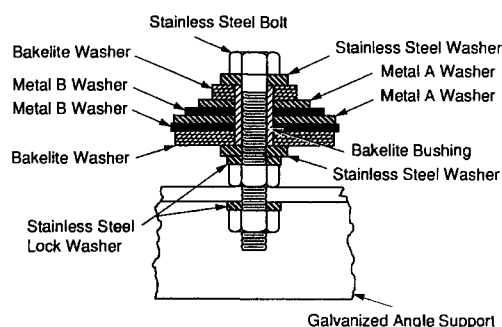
Cross section of disk test assembly for atmospheric galvanic corrosion.
